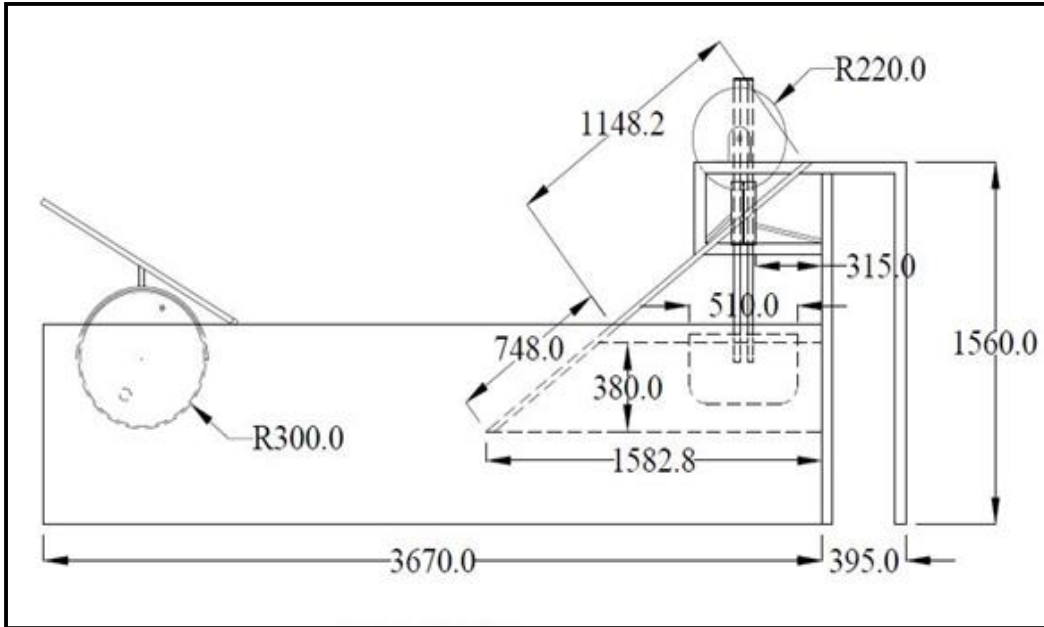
CAD drawing of the Final Prototype model of WEC – Front View
